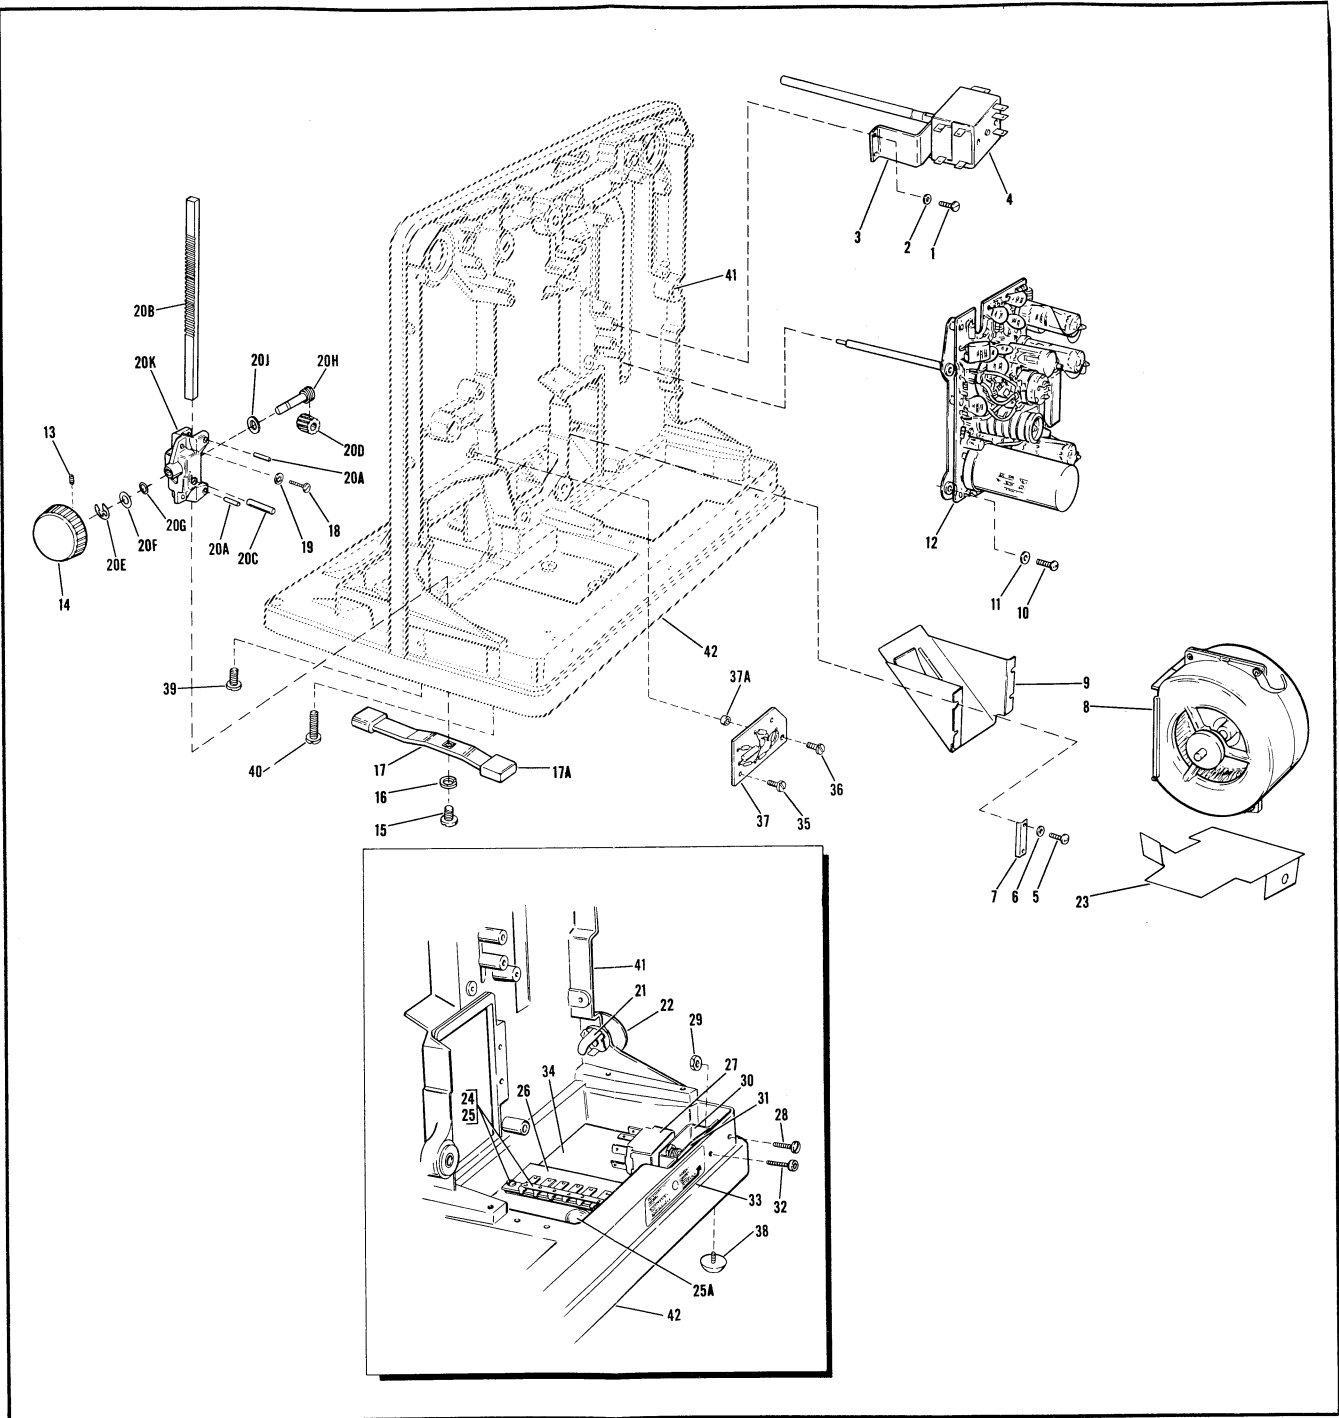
Filmosound Projector Main Plate Exploded (Sheet 4)
